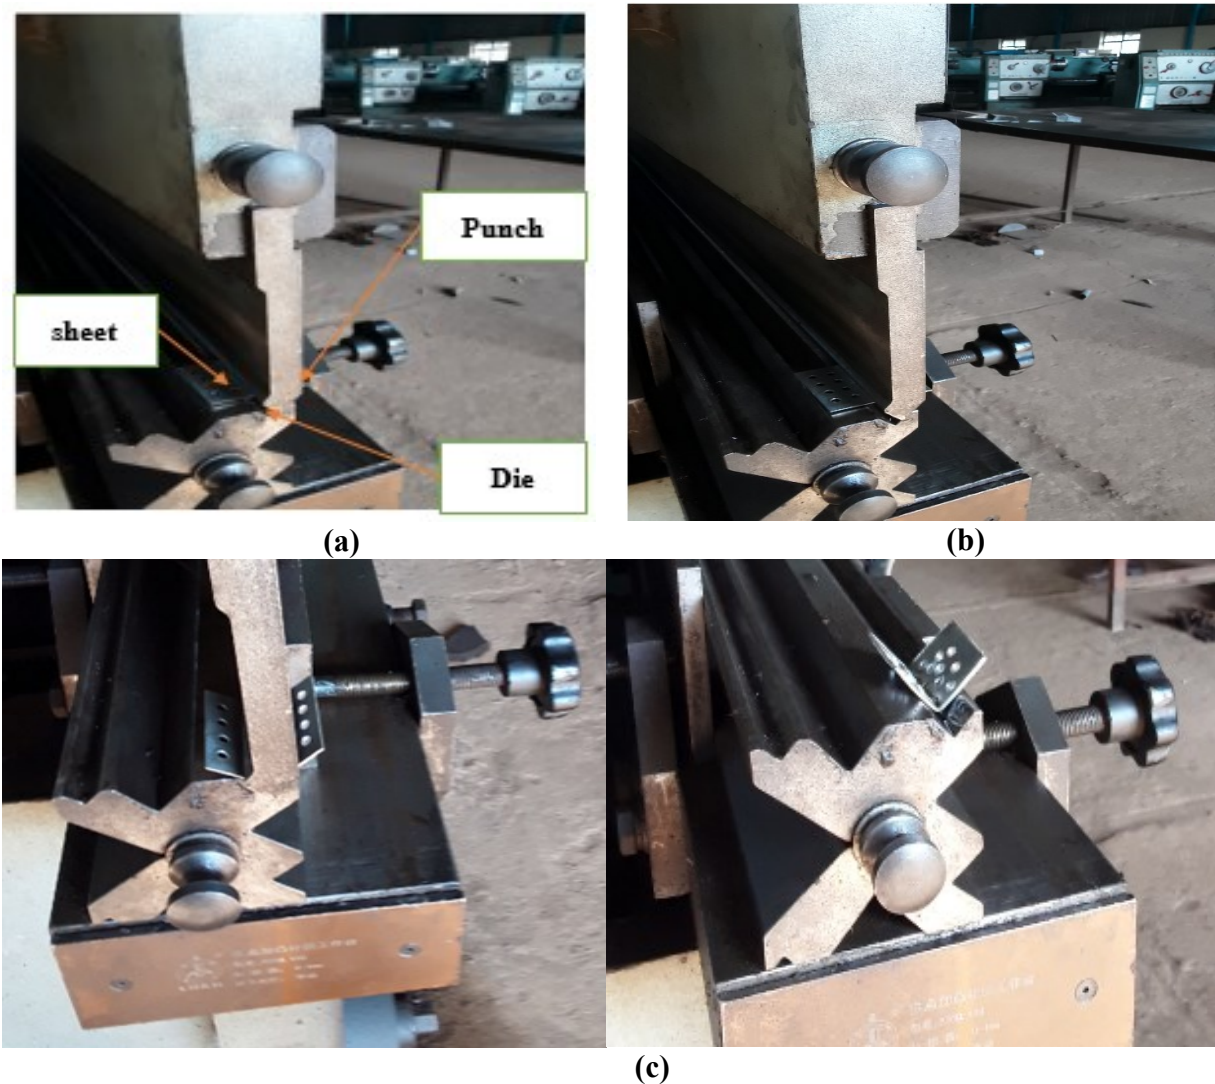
Steps of press brake V-bending process (a) first step of bending, (b) unsupported bending and (c) V-bended samples
